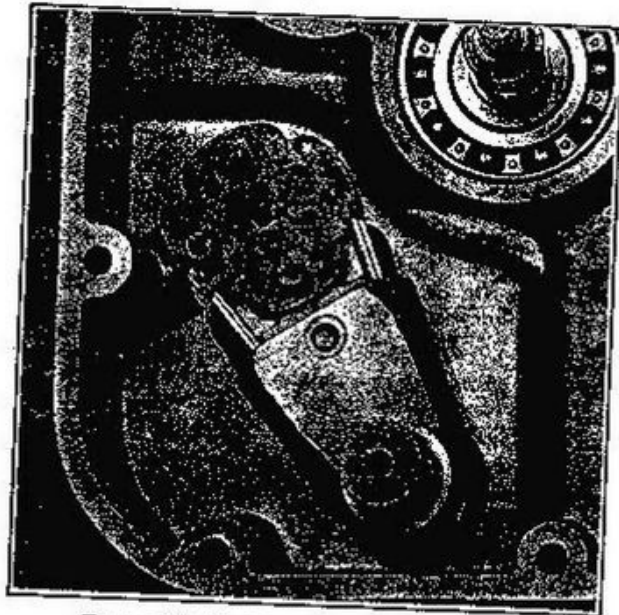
D-43. Position of Shifter Pawl Carrier in Case (1972 & Earlier)
